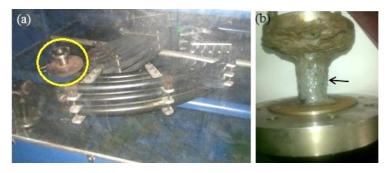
The cooler coils connector in installed condition, indicated by yellow circle (a) and the investigated leaking cooler coils connector is covered by coating material as shown by an arrow (b).
